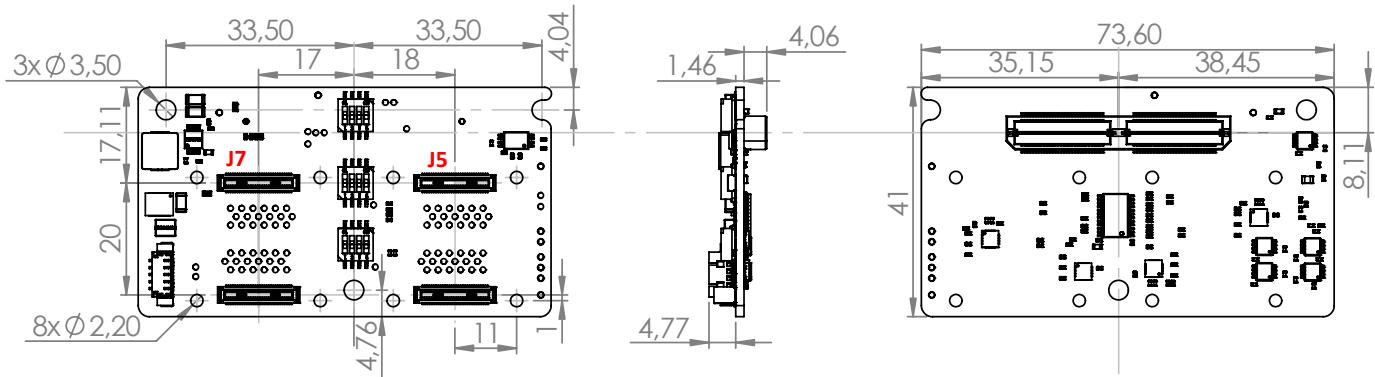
Technical Drawing of FPA-4.A/AGX-V1A
